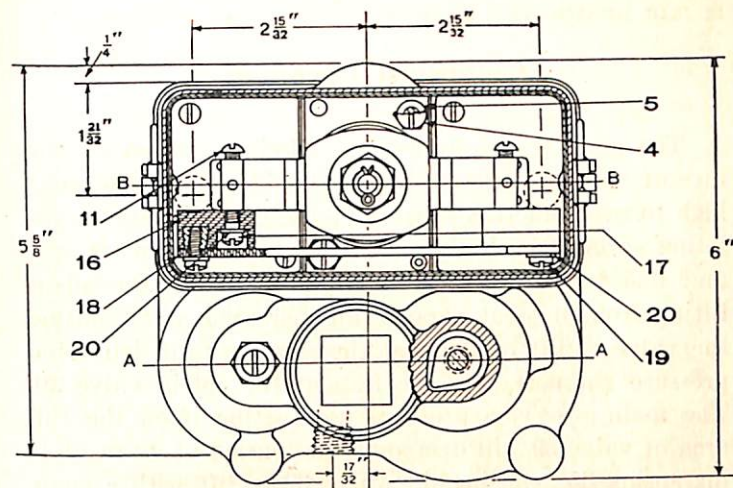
Type S-16 Governor, Plan View and Section through the Switch Piston
